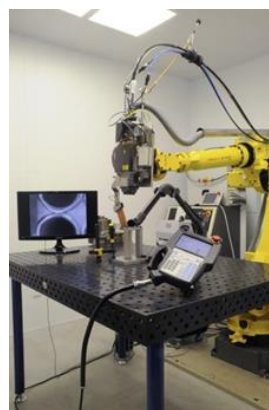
6-axis welding robot FANUC [MTF STU 2015]
